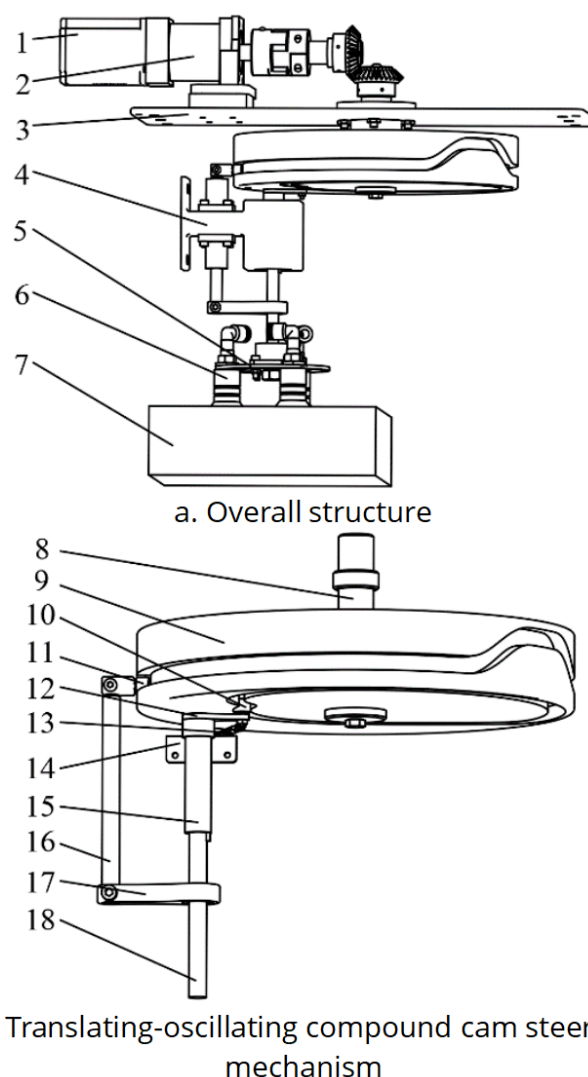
Overall structure of the translating-oscillating compound cam steering mechanism. 1. Stepper motor; 2. Reducer; 3. Fixed upper plate; 4. Fixed frame; 5. End-effector disk; 6. Suction cups; 7. Packaged vegetables; 8. Rotating spindle; 9. Translating-oscillating compound cam; 10. Oscillating roller; 11. Translating roller; 12. Oscillating lever; 13. Spring; 14. Spring fixing frame; 15. Sleeve; 16. Movable shaft; 17. Connecting plate; 18. Shift shaft.
